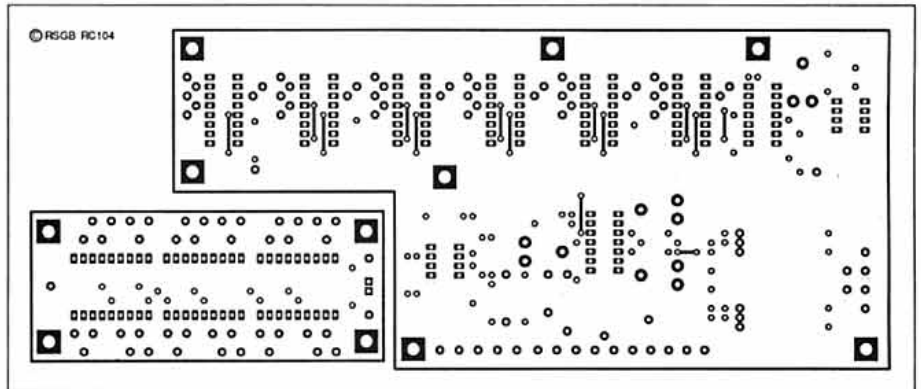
PCB solder side, viewed as if looking through the PCB from component side (50% actual size).
